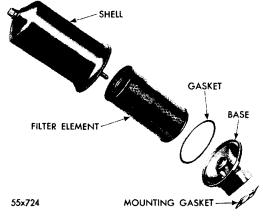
Full Flow Type Oil Filter (Disassembled View)
